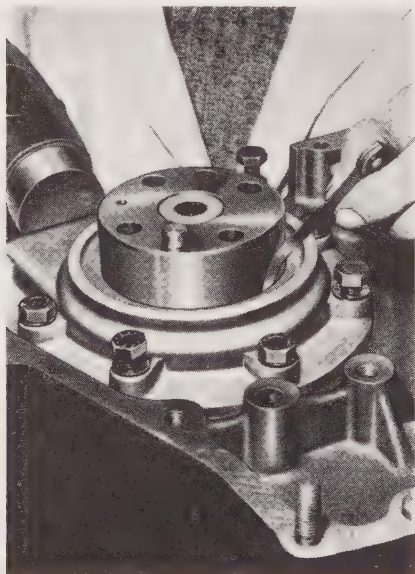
36 Adjustment of housing clearance at rear of crankshaft.
